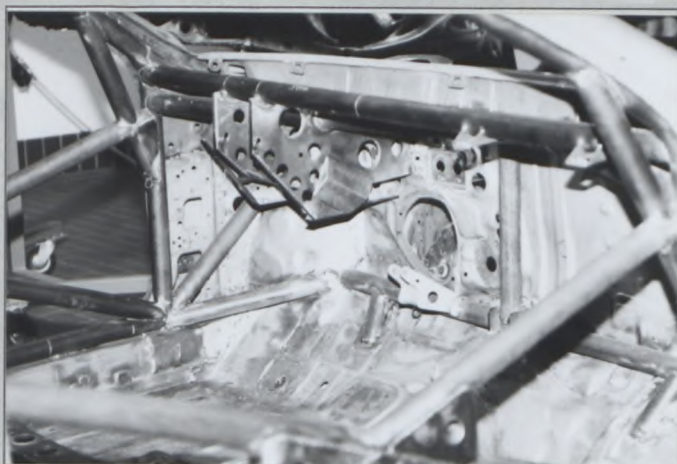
(FRONT HOOP TO FLOOR)
